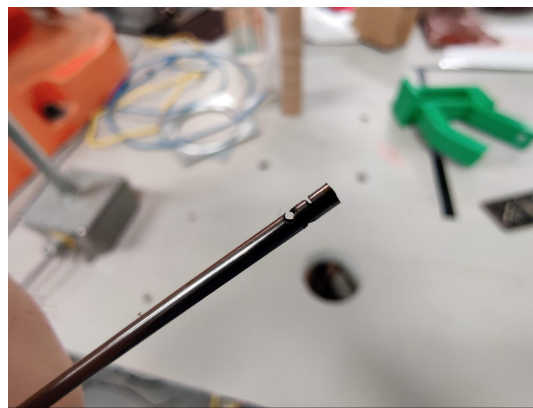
Initial cuts with wire EDM. The first notch is cleanly cut while the second notch was improperly cut due to a failure in the machining fixture.
